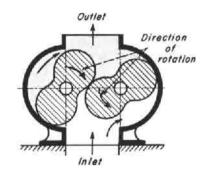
A gear pump transports liquid between the tooth spaces and the housing wall. A circular tooth shape ha sonly one tooth making contact, and it is more efficient than an involute shape which might enclose a pocket between two adjoining teeth, recirculating part of the liquid. The pump has helical teeth.
